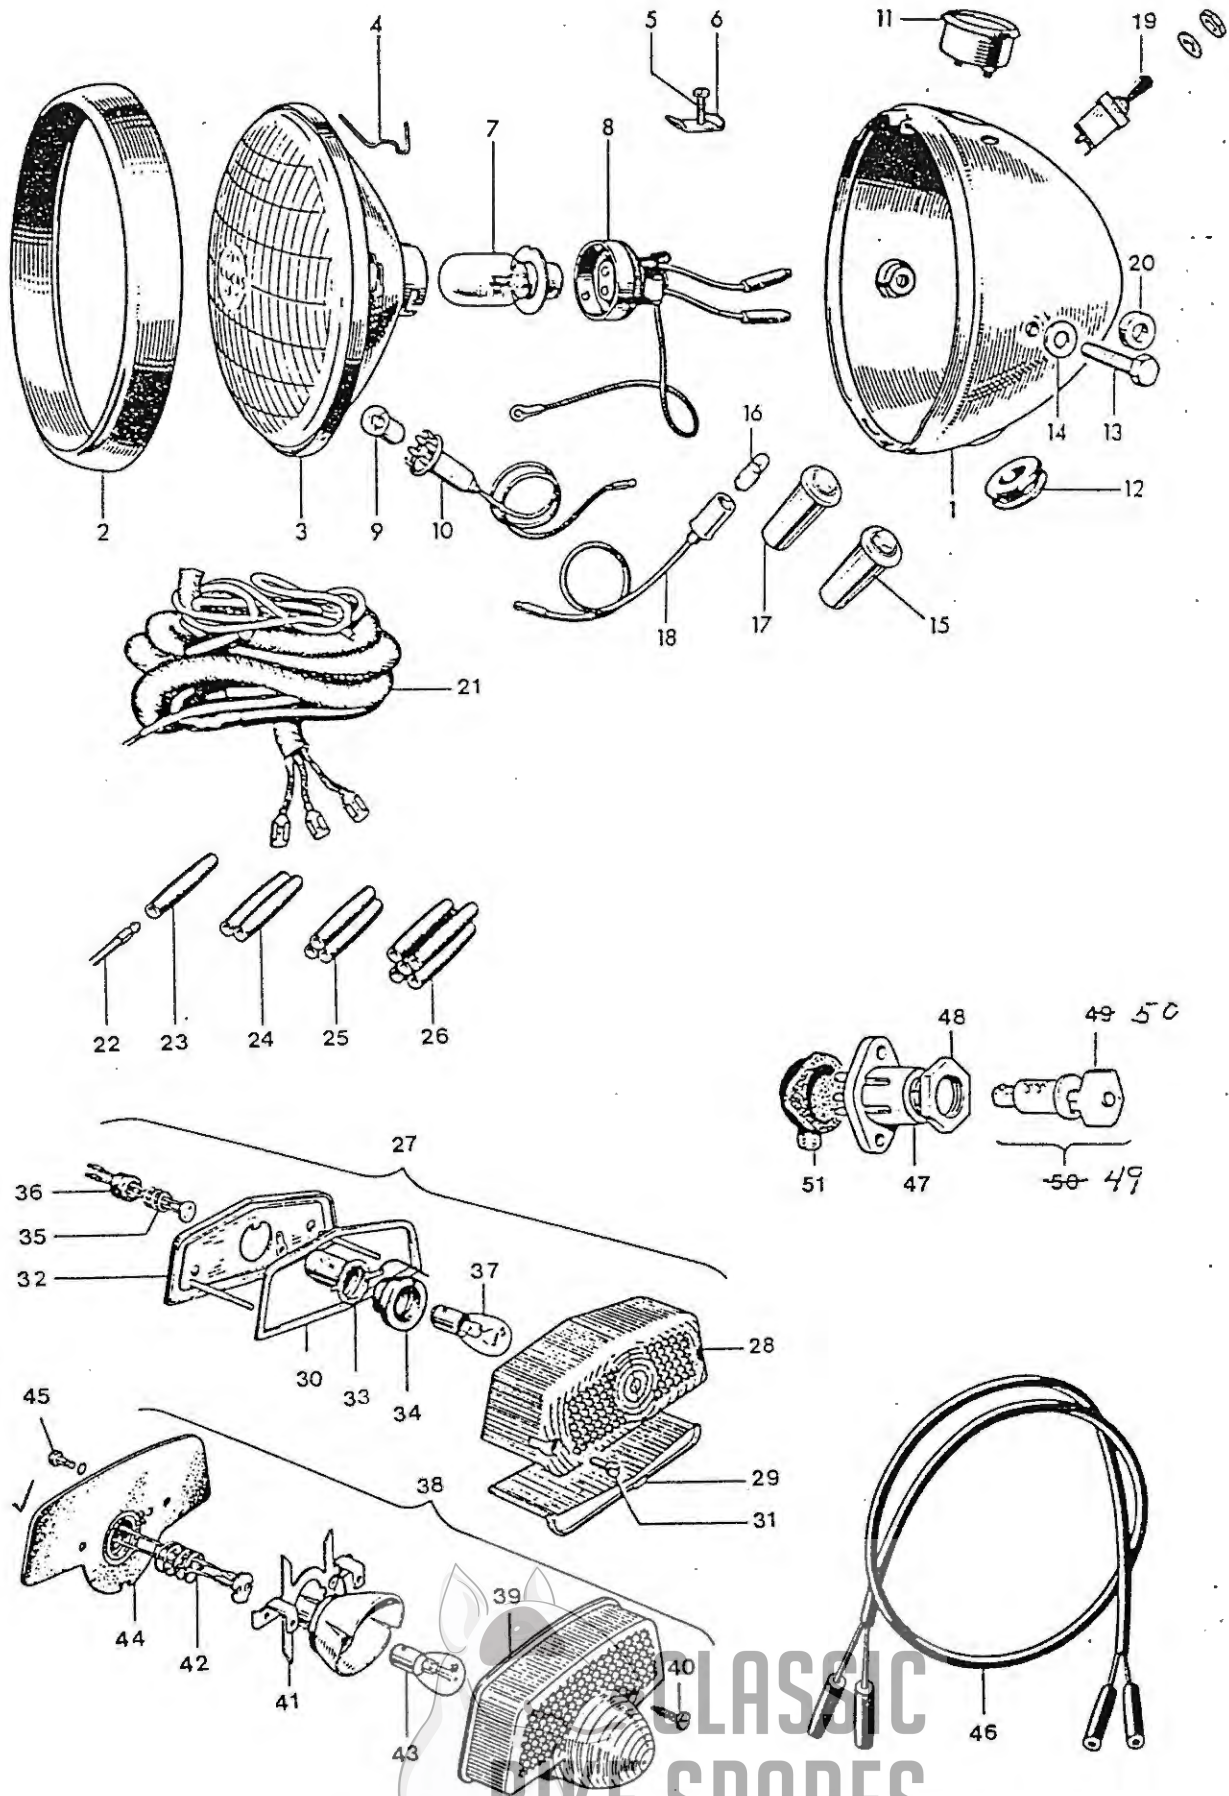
HEADLAMP, WIRING HARNESS, SWITCHES AND TAIL LAMP
